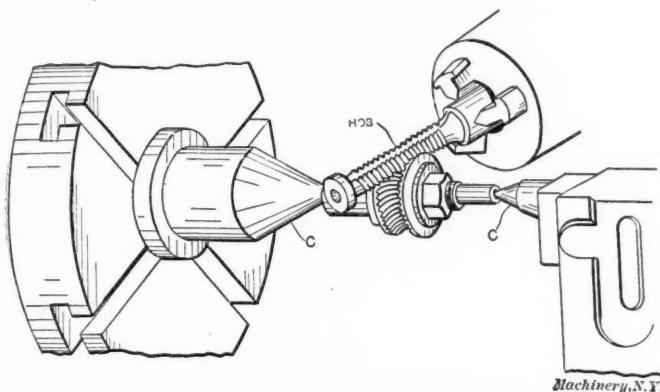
Cutting a Concave Knurl by a Hob in the Milling Machine
